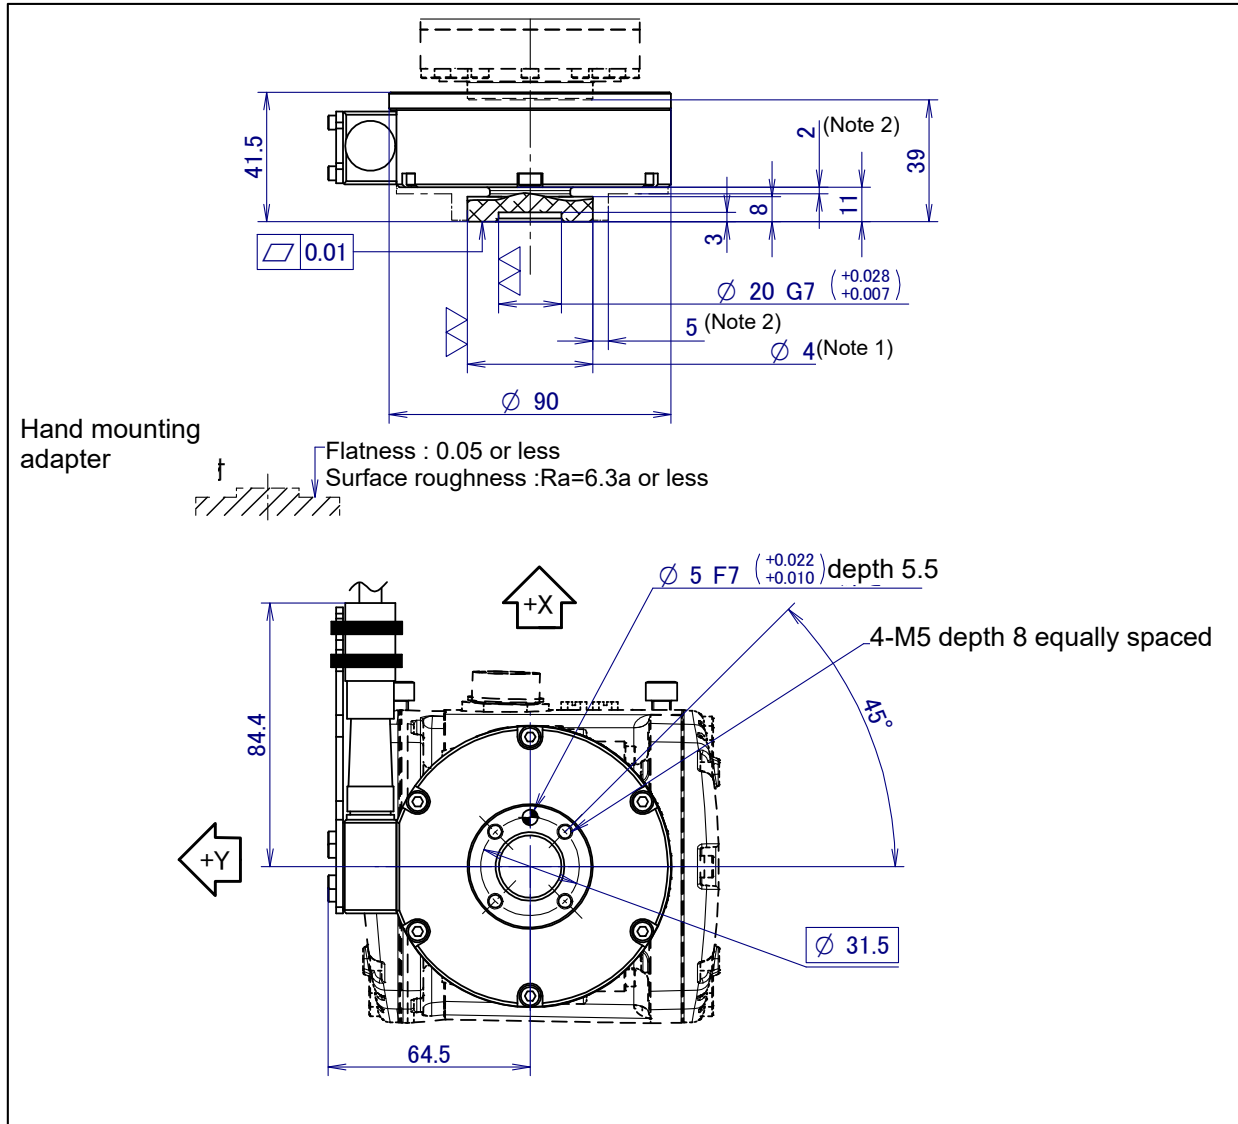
(f) Wrist section end effector mounting surface (FS-15iAe)
